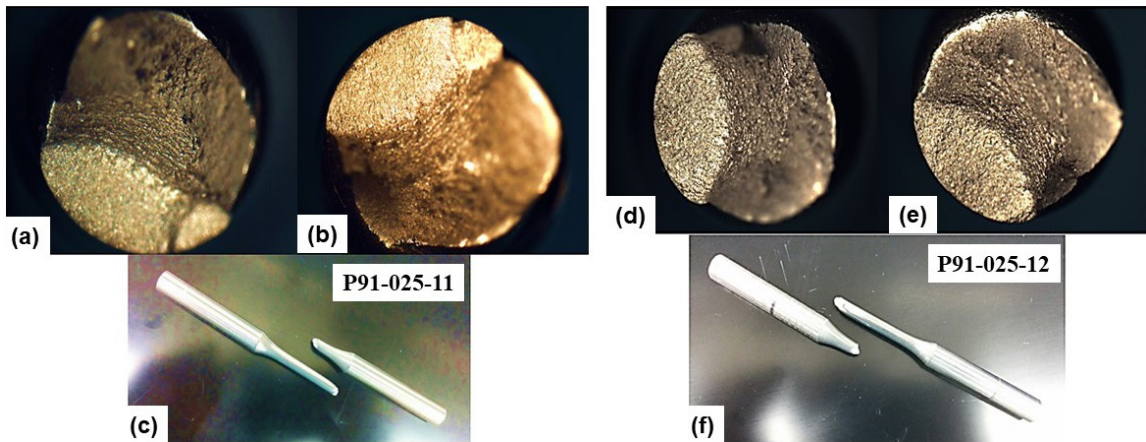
Broken specimen pictures. a) P91-025-11 fractured section taken by microscope; b) other half of the P91-025-11 fractured section; c) point of fracture; d) P91-025-12 fractured section taken by microscope; e) other half of the P91-025-12 fractured section; f) point of fracture.
